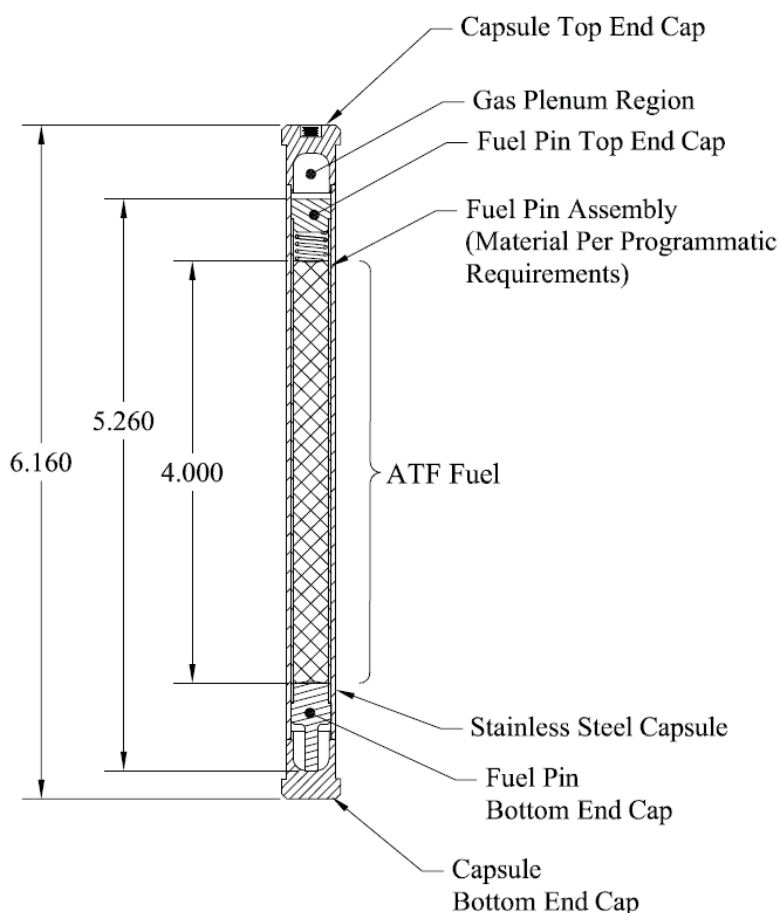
ATF-1 Capsule and Rodlet Assembly.
